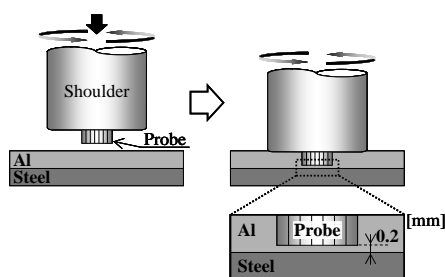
Schematic illustrations of friction stir spot welding process.
